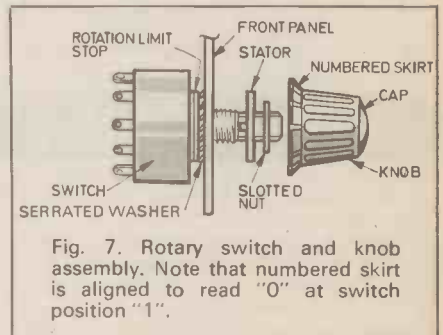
Rotary switch and knob assembly. Note that numbered skirt is aligned to read "0" at switch position "1".
